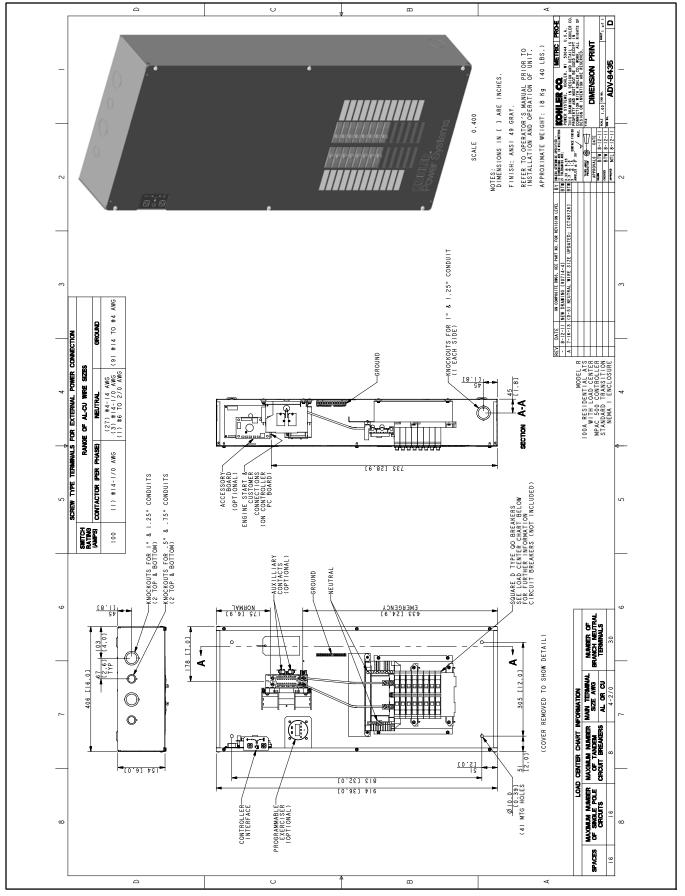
Dimension Drawing, 100 Amp NEMA Type 1 Enclosure with Load Center, ADV-8435
